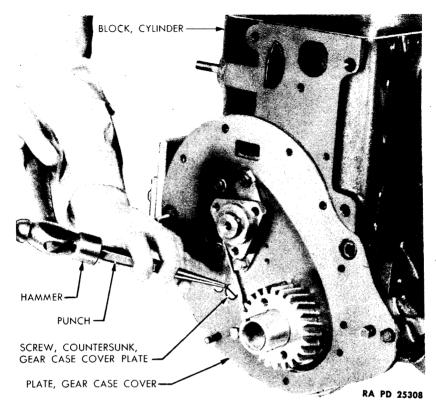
Staking Gear Case Cover Plate Screw In Place
